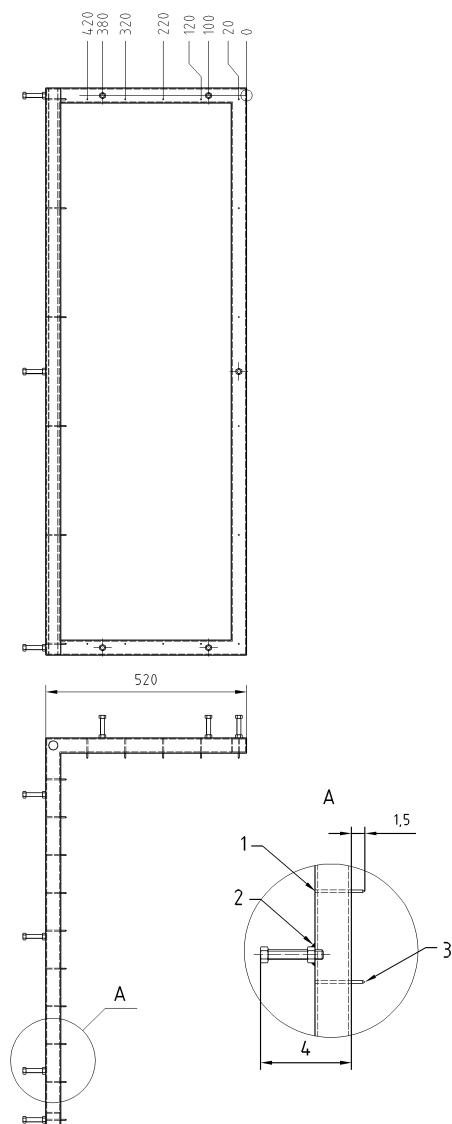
Example of metallic frame for holding test pieces – View 1
